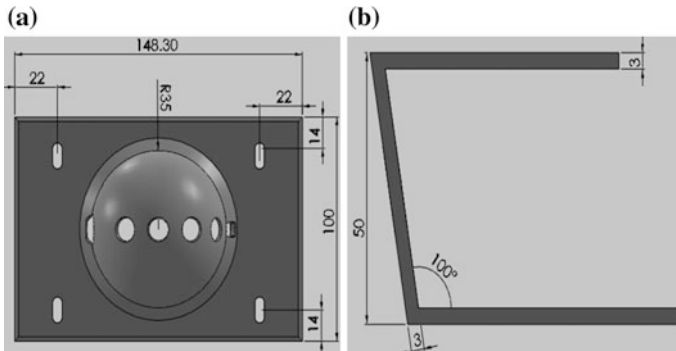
Front views of the a hand support part and b slanting motor holder part
